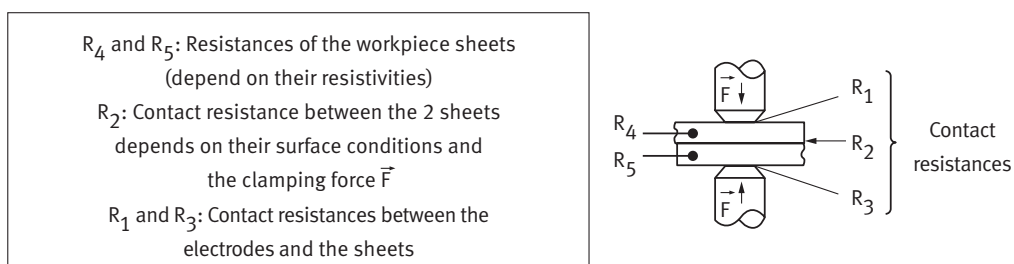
Principle of resistance spot welding
